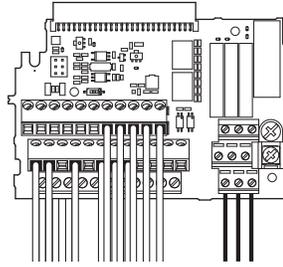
Drive Replacement: Removable Control Terminal Board Disconnected from the Drive
